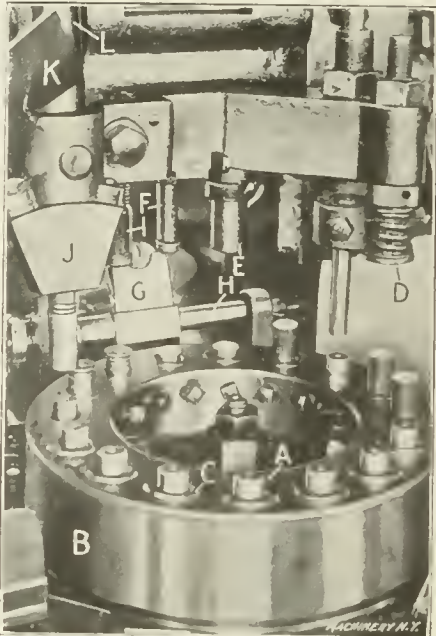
Machine for Assembling the Braee Cap and Paper Shell
